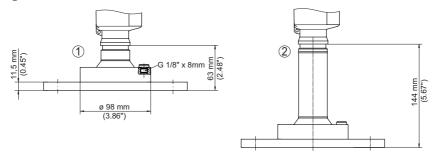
NivoRadar 3300, flange with lens antenna (flange thickness acc. to drawing, flange dimensions acc. to DIN, ASME, JIS)
